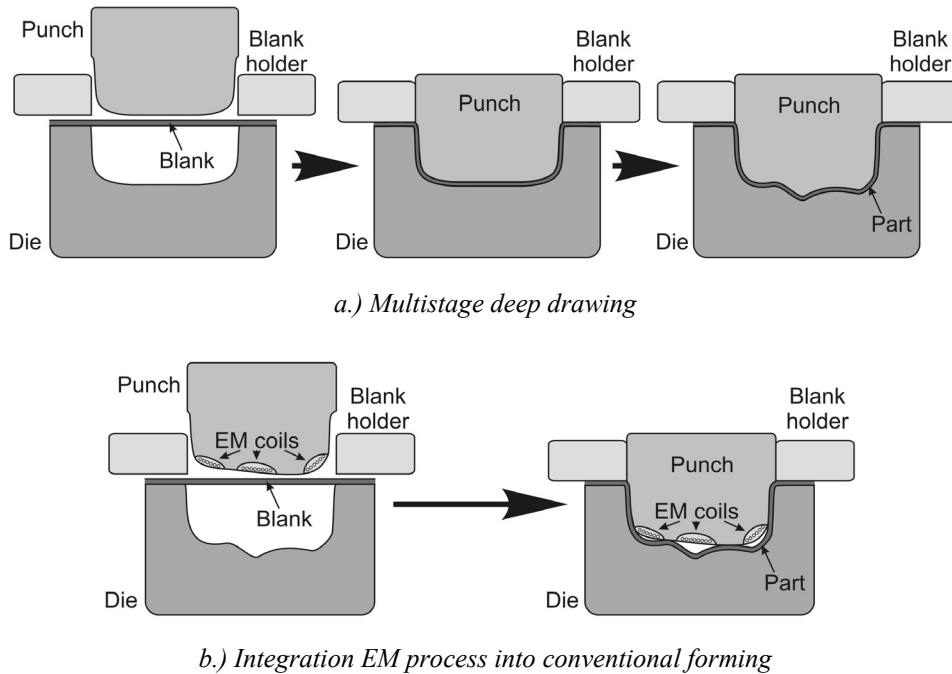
Comparison of multistage deep drawing and hybrid technology with incorporation of EM coils into conventional tool
